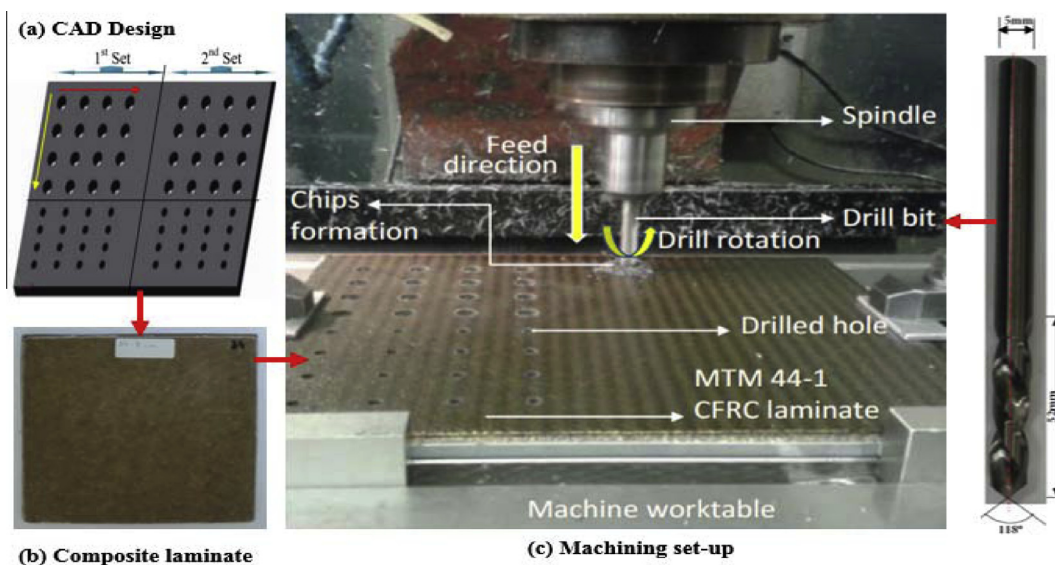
The drilling experimental set-up based on Taguchi technique.
